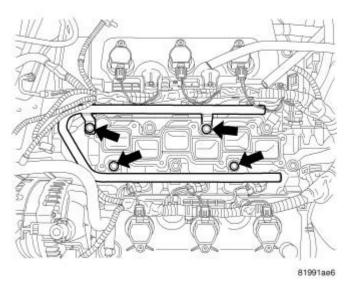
Identifying Fuel Rail Bolts Courtesy of CHRYSLER LLC
